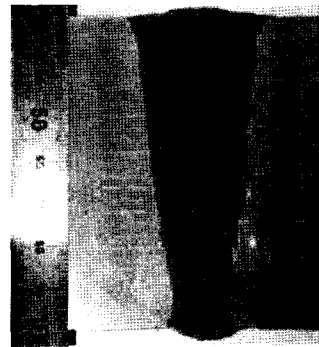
Macro section of through a 75mm thick EGW with 2 poles
